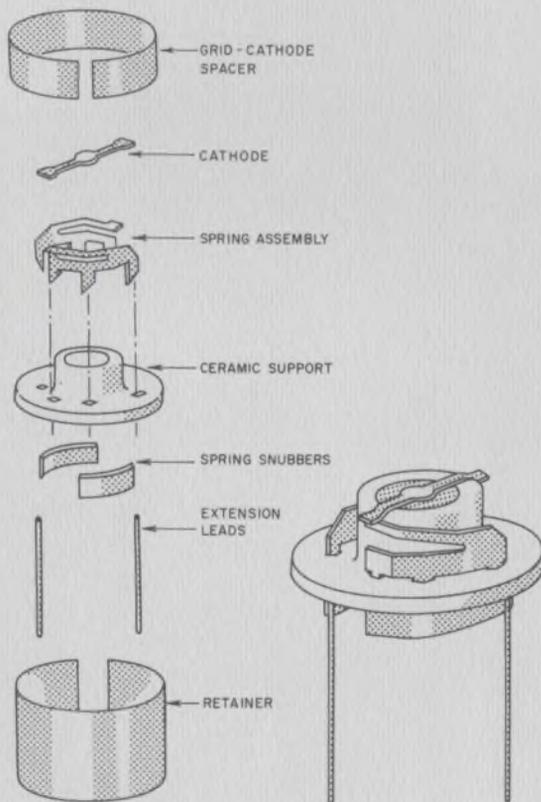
Construction of the new instant warm-up picture tube cathode assembly.
